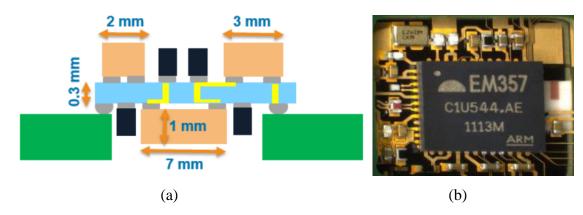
A RF module on 3D glass interposer: (a) cross section of the proposed package, and (b) top view of assembled RF module on glass.
